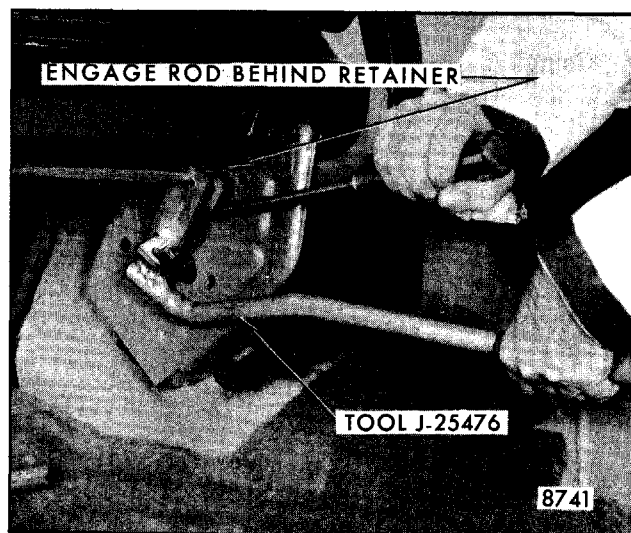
Torque Rod Engagement - Cadillac "K" Style
